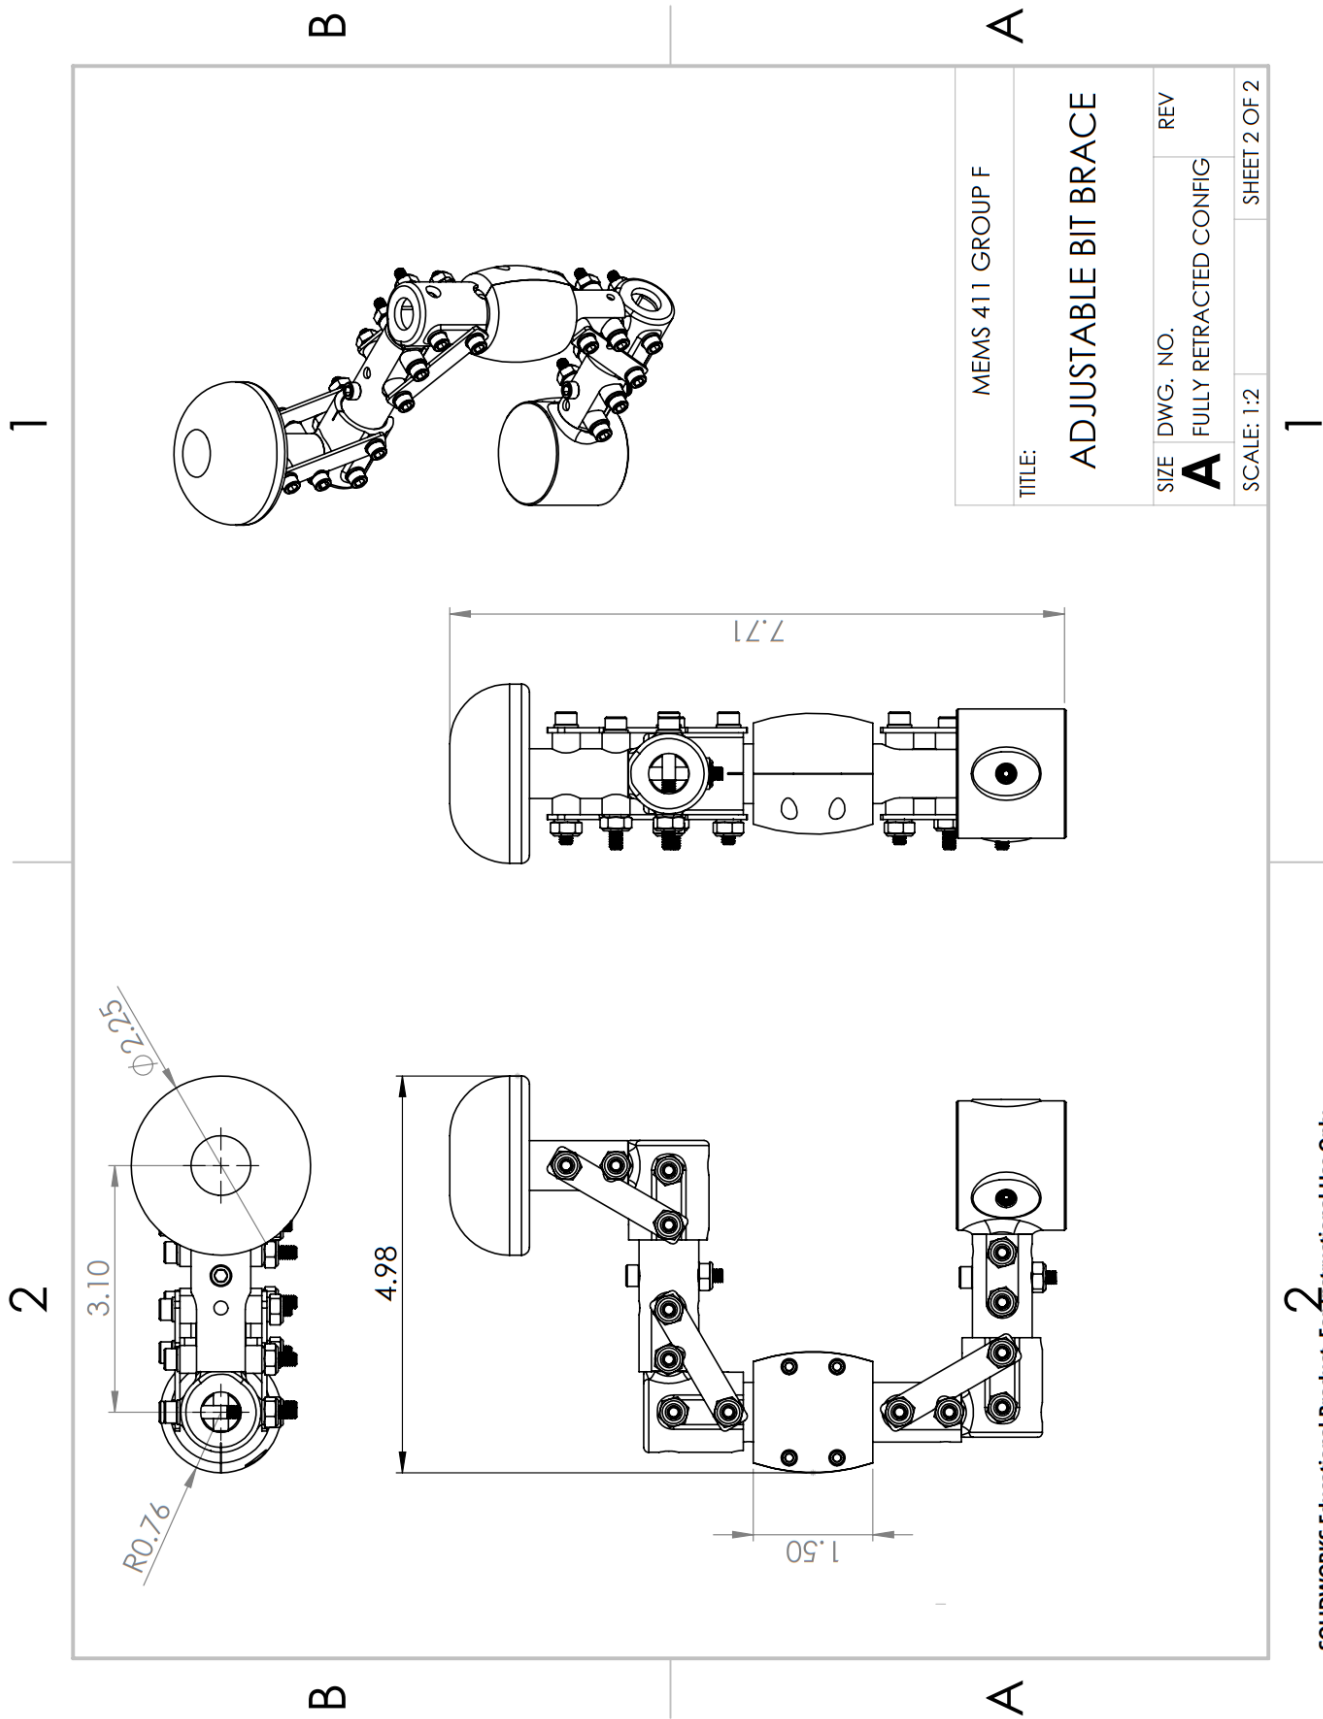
Assembled Bit Brace Contracted Configuration with overall dimensions
